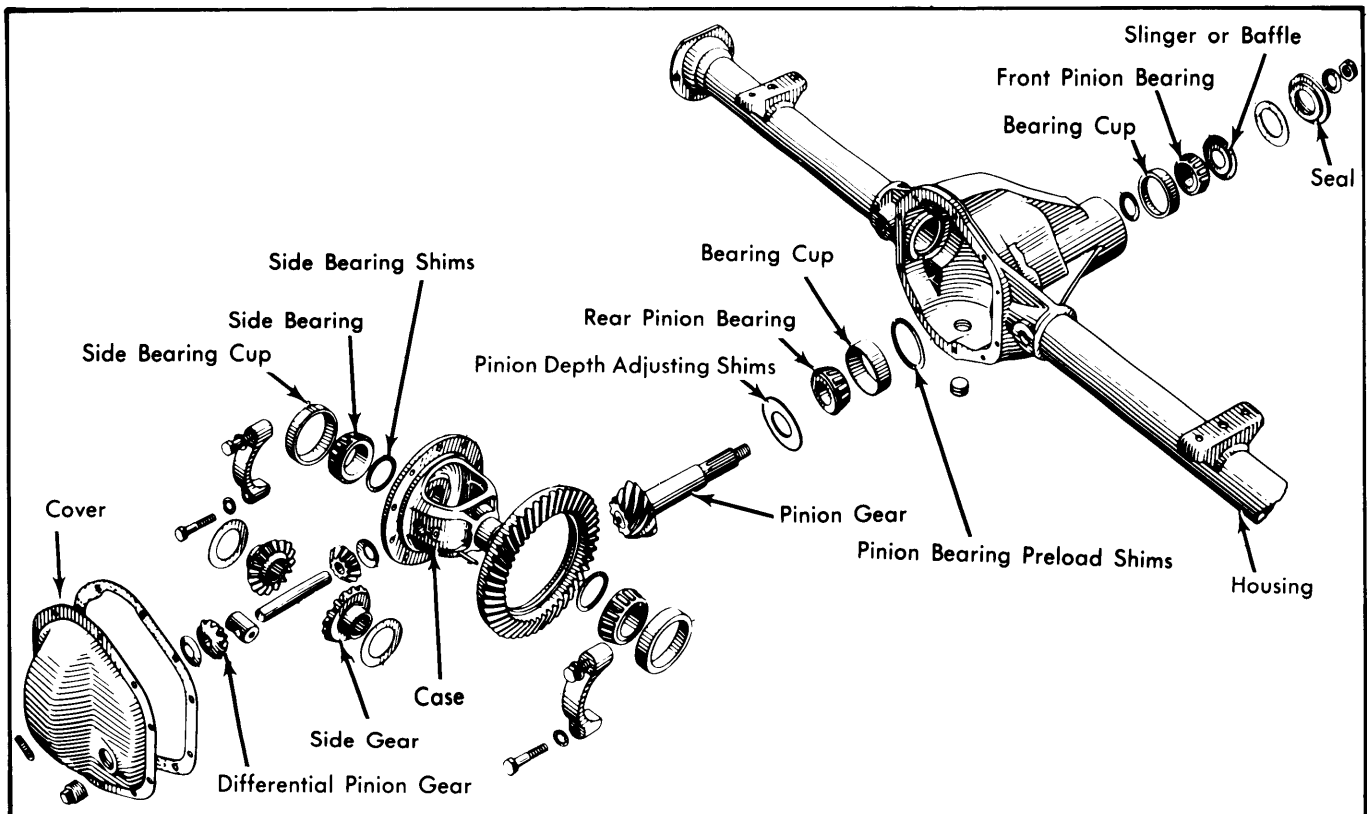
Exploded View of Dana/Spicer Semi-Floating Axle Assembly
